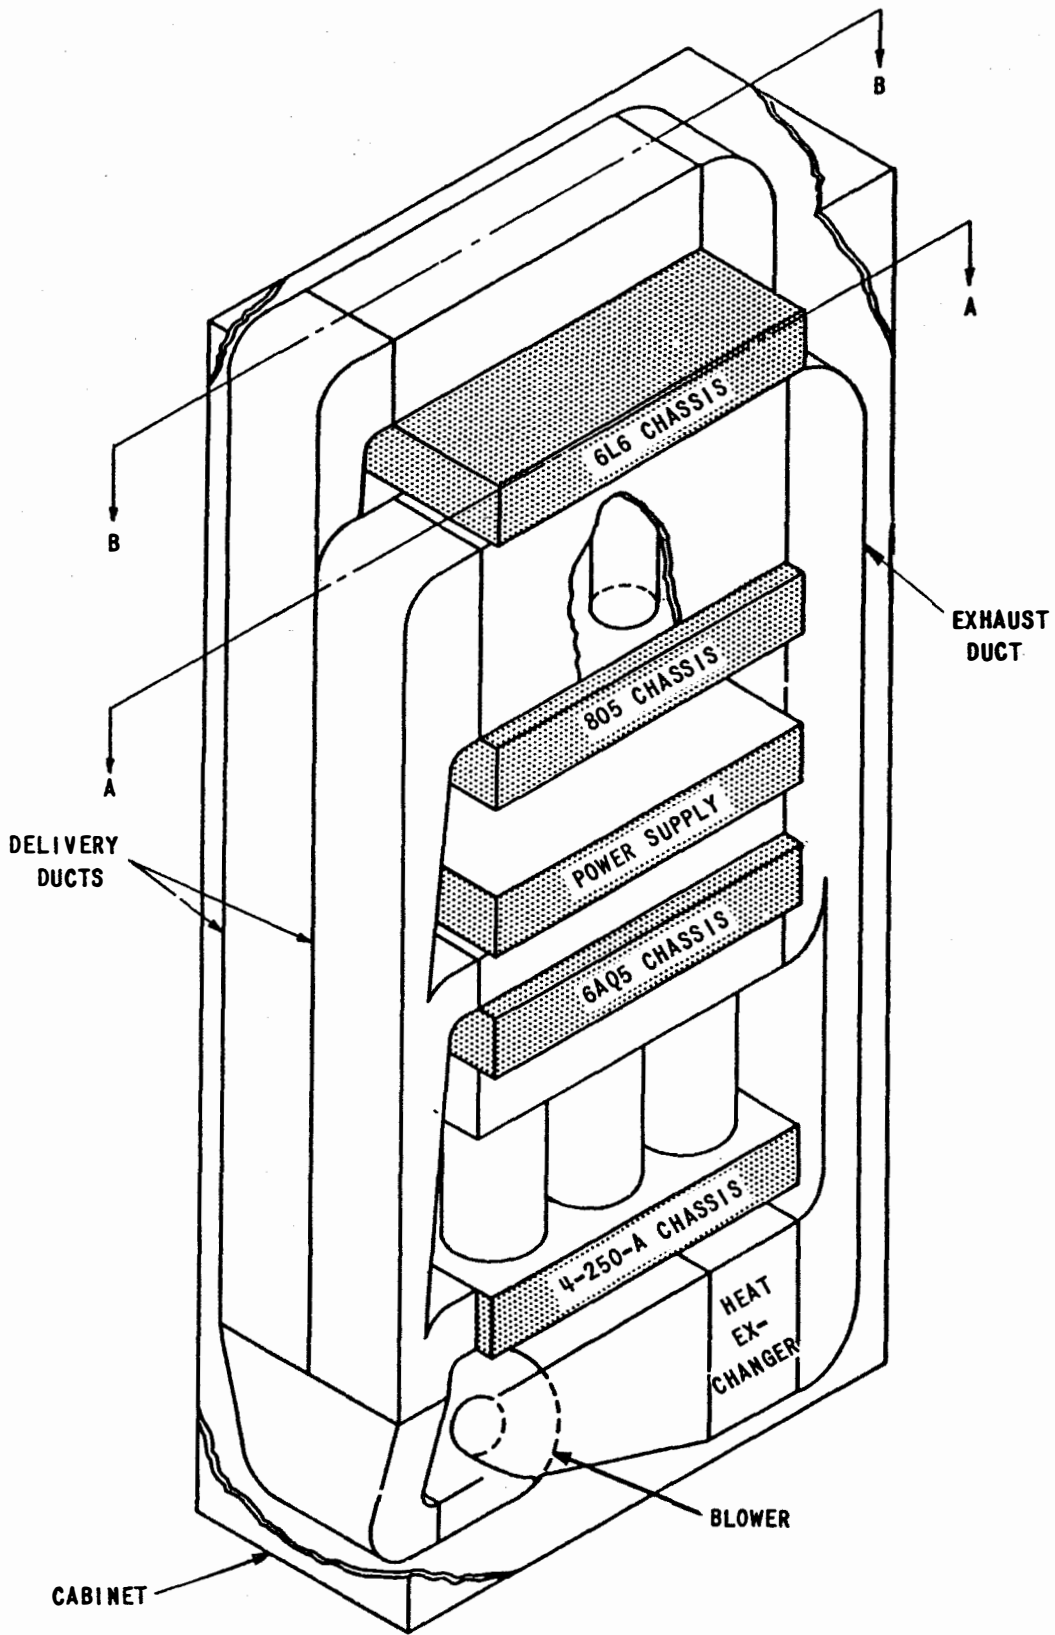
RACK-TYPE FORCED-AIR COOLED CABINET
